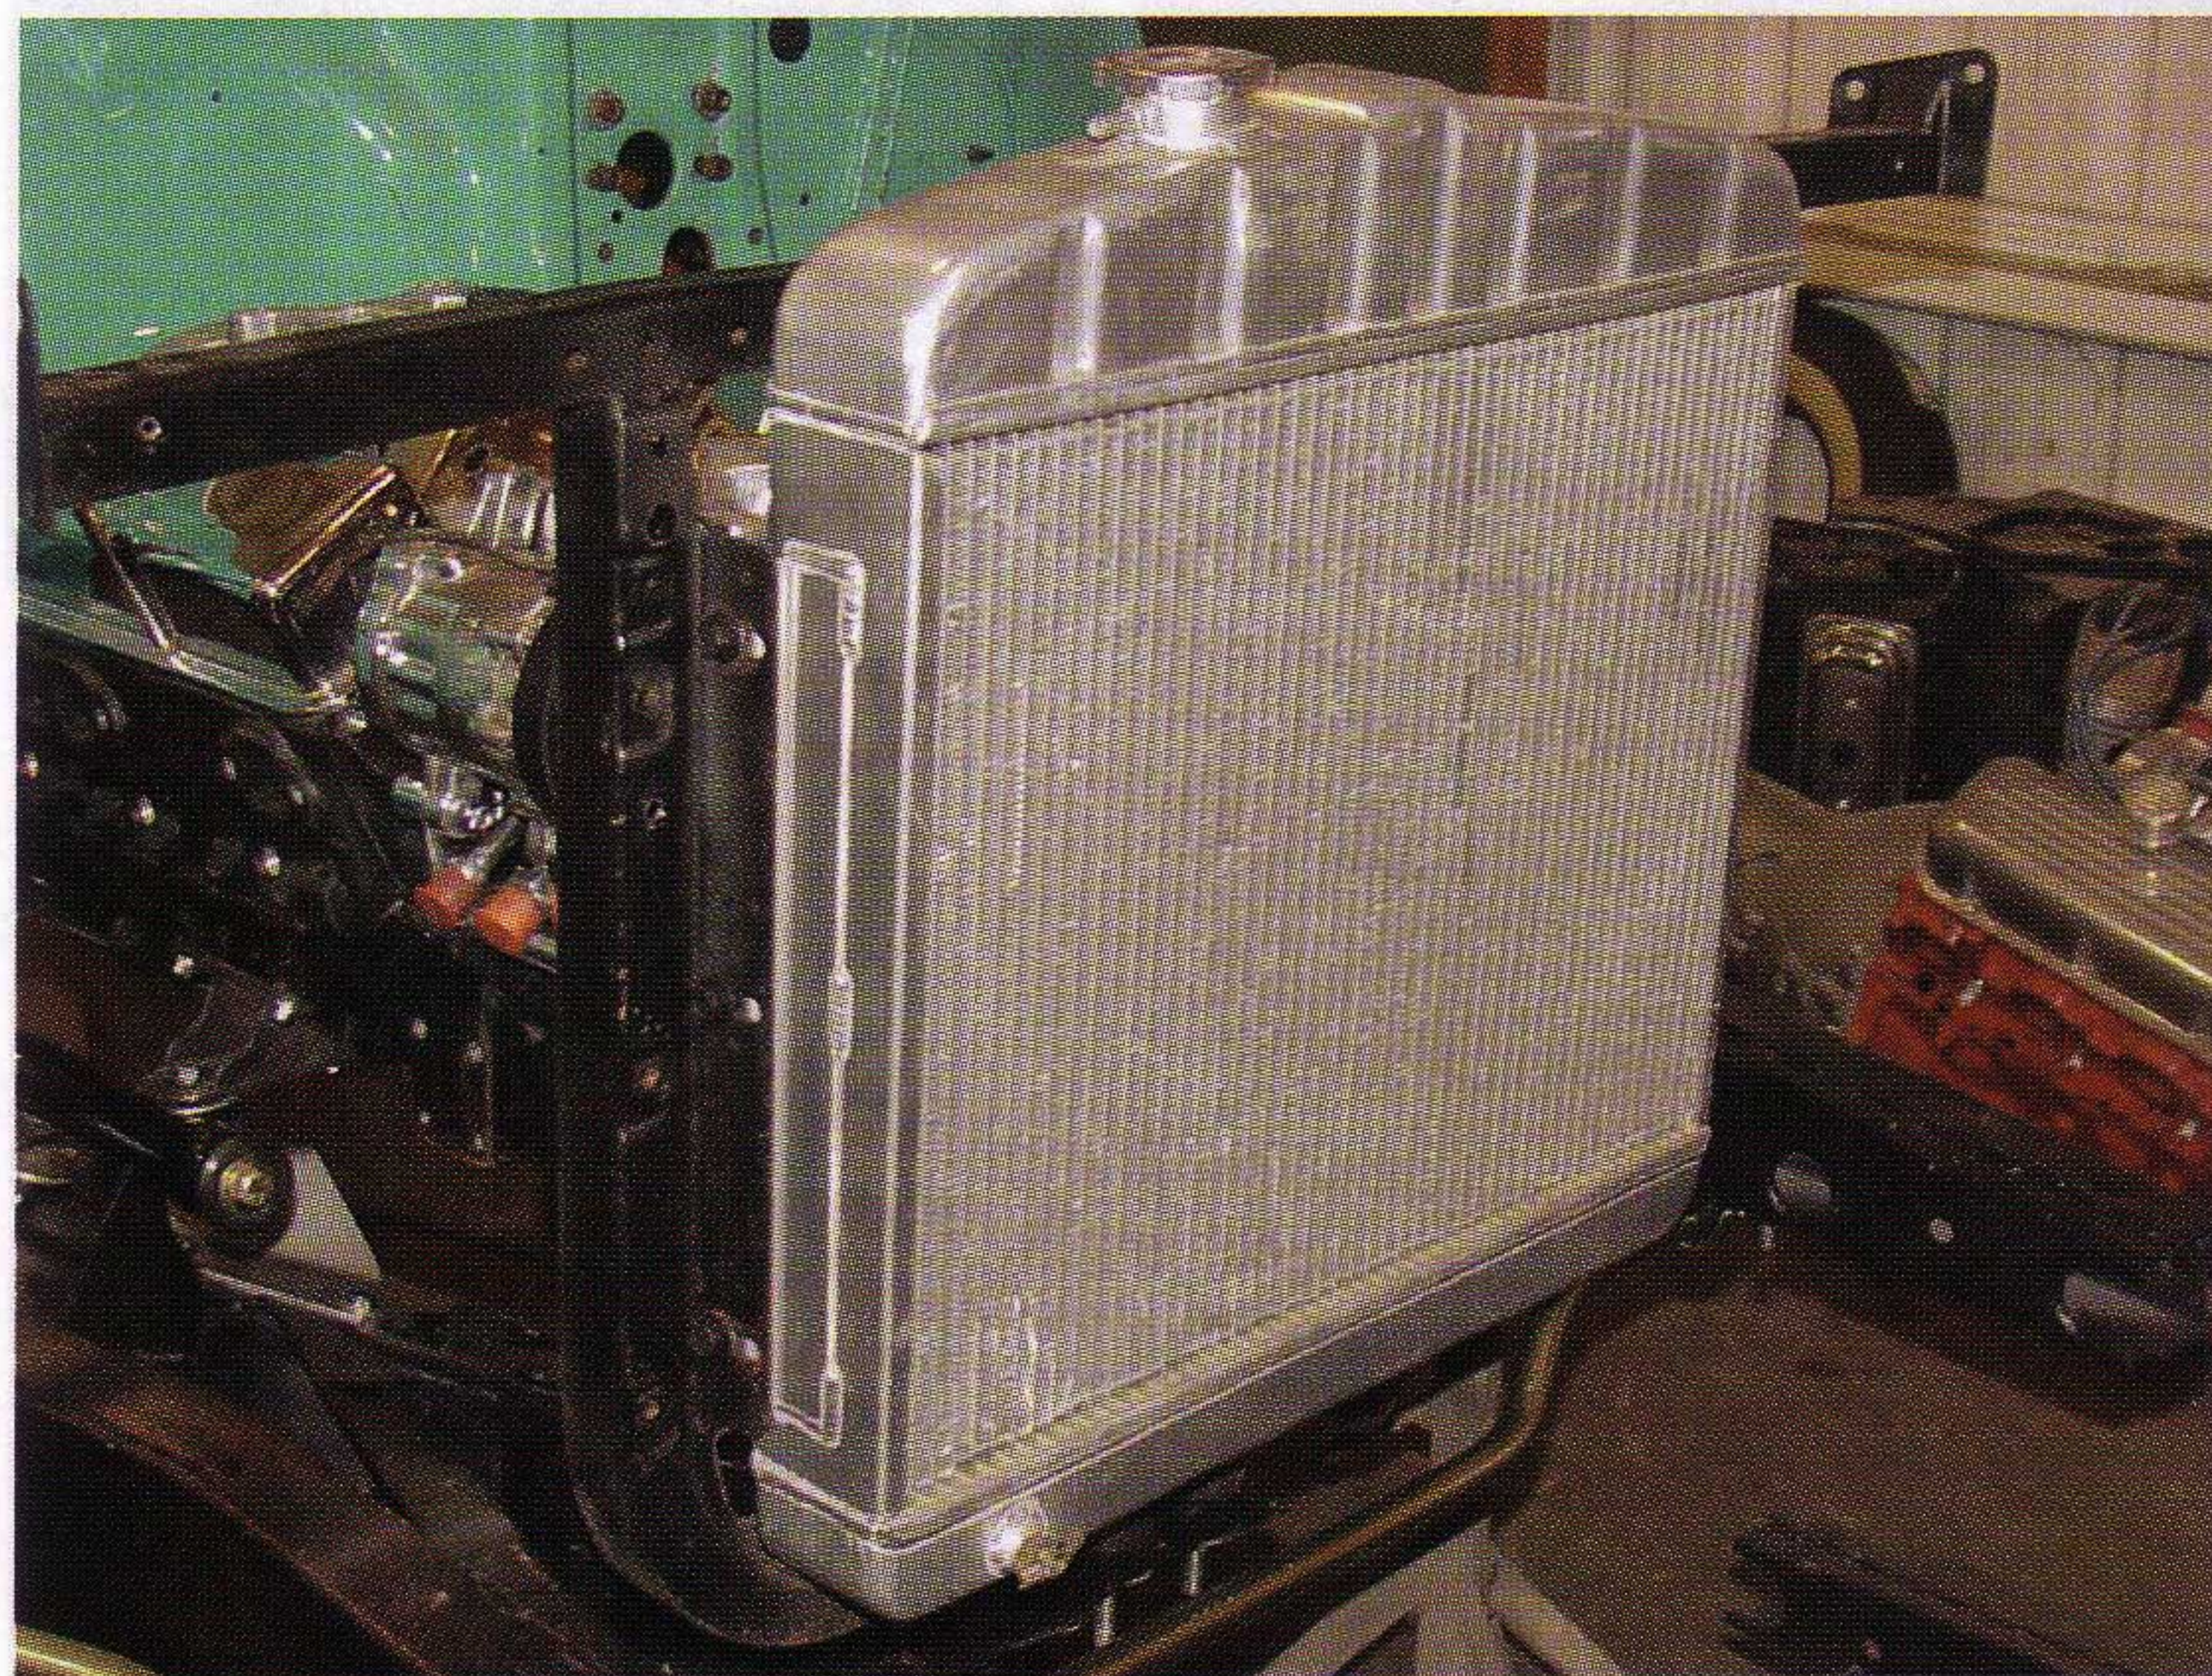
When using the serpentine system the radiator must be located in the 6-cylinder position in front of the core support. If you currently have a V8 radiator and V8 core support, you can easily move it to the 6-cylinder position using relocation kit P/N 18-44. With the radiator in the 6-cylinder position there is plenty of room for either a fan blade or an electric fan system. The serpentine systems also work well with our Griffin cross-flow radiators. Good Luck!
